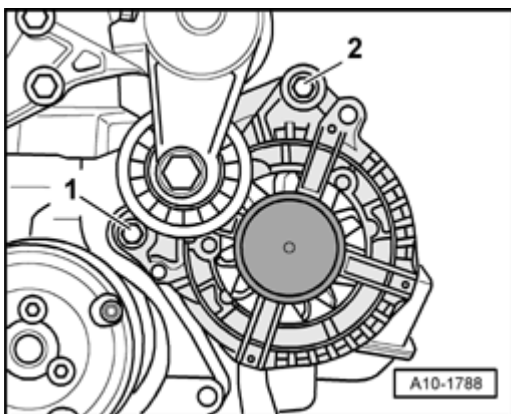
Removing Upper/Lower Securing Bolt For Generator
